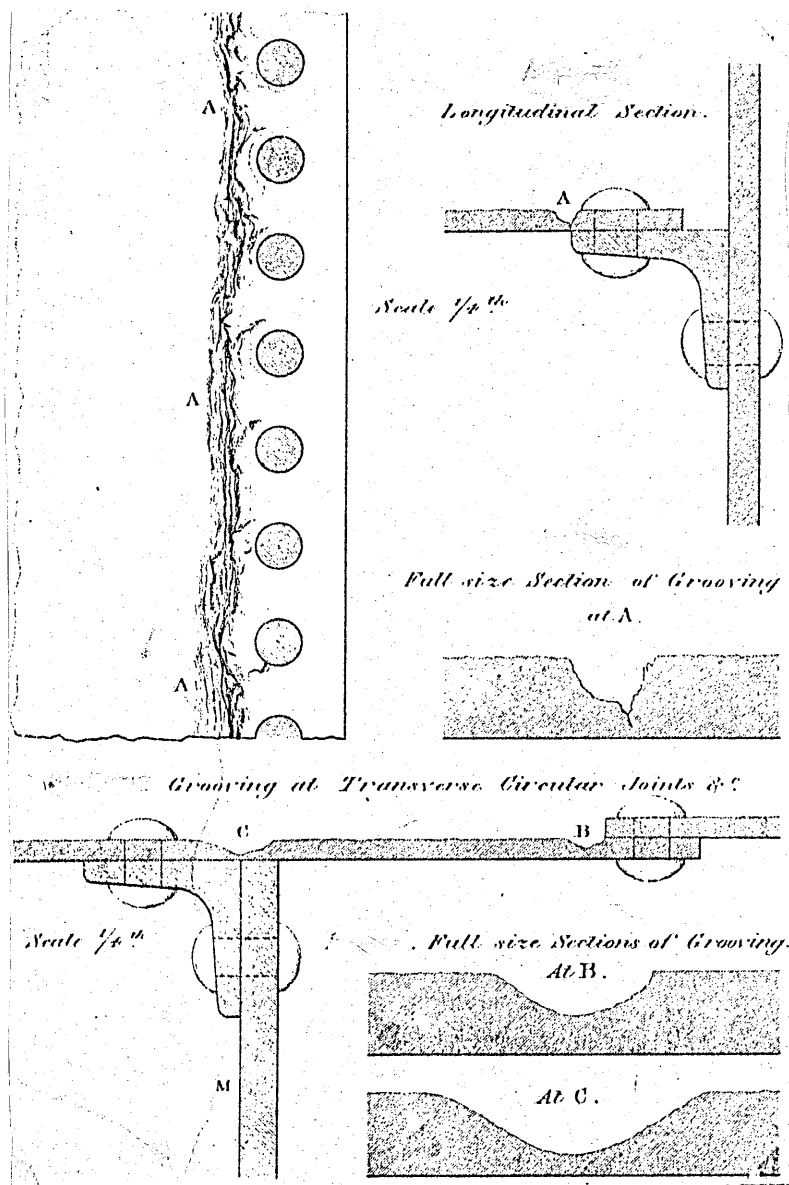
GROOVING CAUSED BY CORROSION IN BOILER BARRELS WITH ANGLE-IRON
